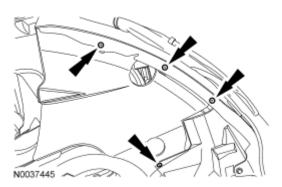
Locating RH Fender Splash Shield Screws Courtesy of FORD MOTOR CO.
